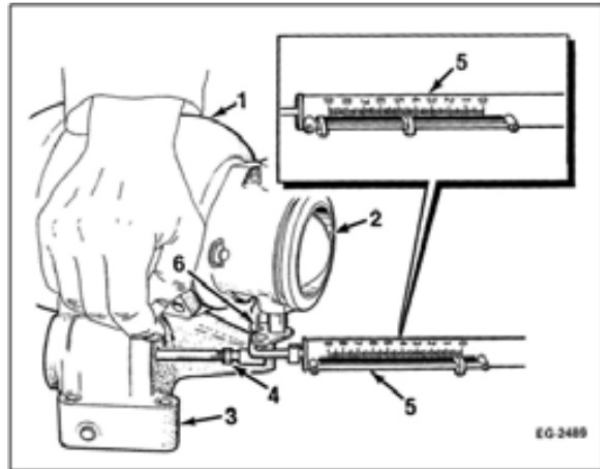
Testing Control Rod Preload (Late 1997 Model Year Shown)
